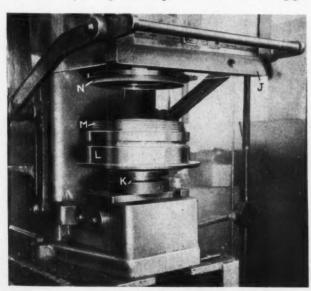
Assembly of outer rotors to bearings, and inner rotors to outer rotors, is performed on this Hi-Ton hydraulic press, which provides a high pressure for the first stage, and a low pressure for the second, to avoid dishing of the inner rotor
